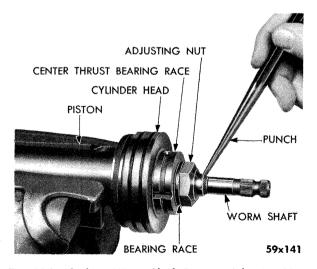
Staking Worm Shaft Bearing Adjusting Nut
